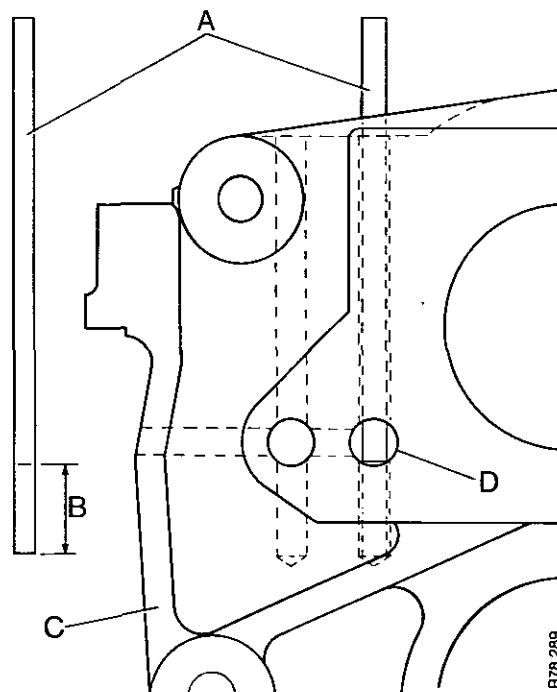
CHECKING DEPTH OF DETENT SPRING HOLES
